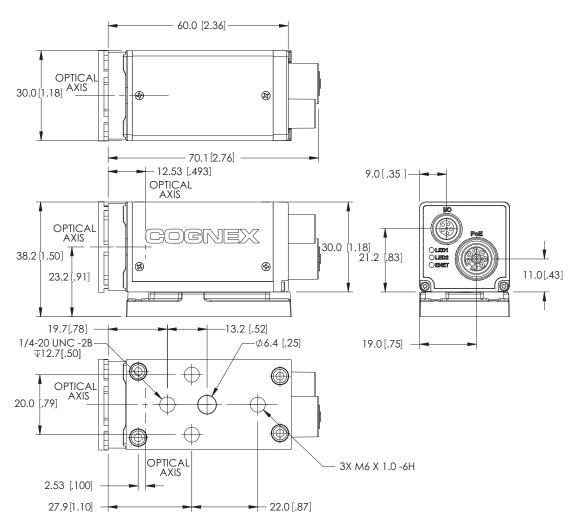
In-Sight Micro Vision System Dimensions (with Mounting Block)
